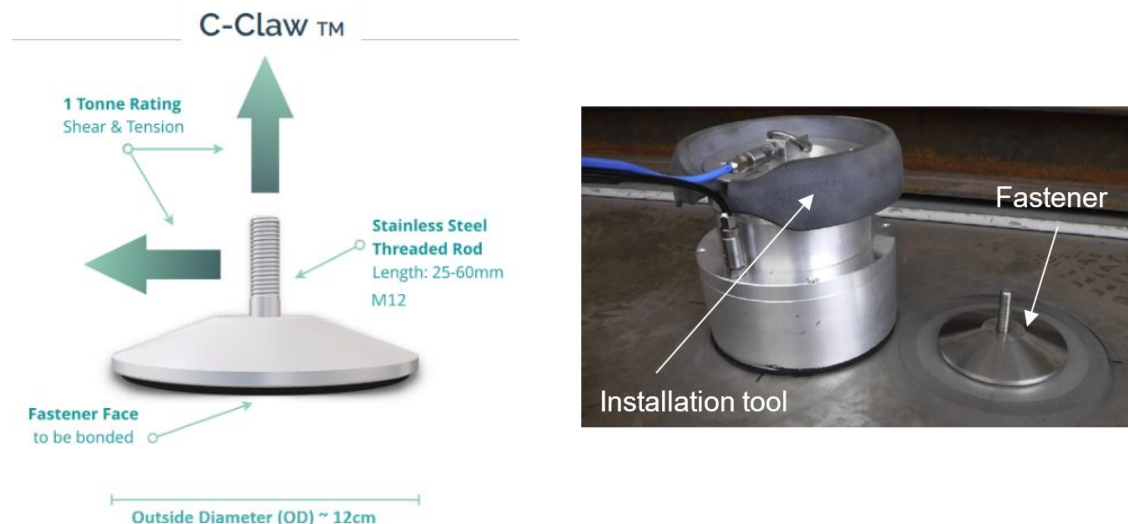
(a) Bonded fastener solution (b) Installation tool developed by Cold Pad [4]
